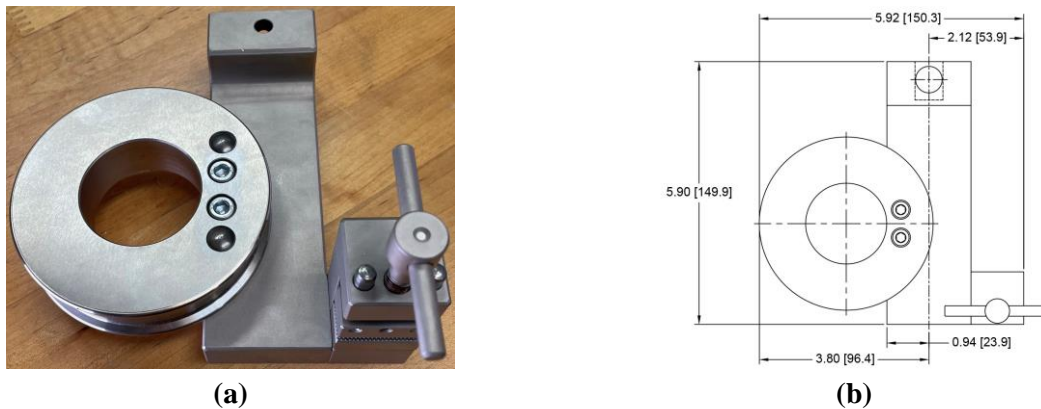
G1092 fixture: (a) the fixture; and (b) dimensions in inches. [mm] [25].
